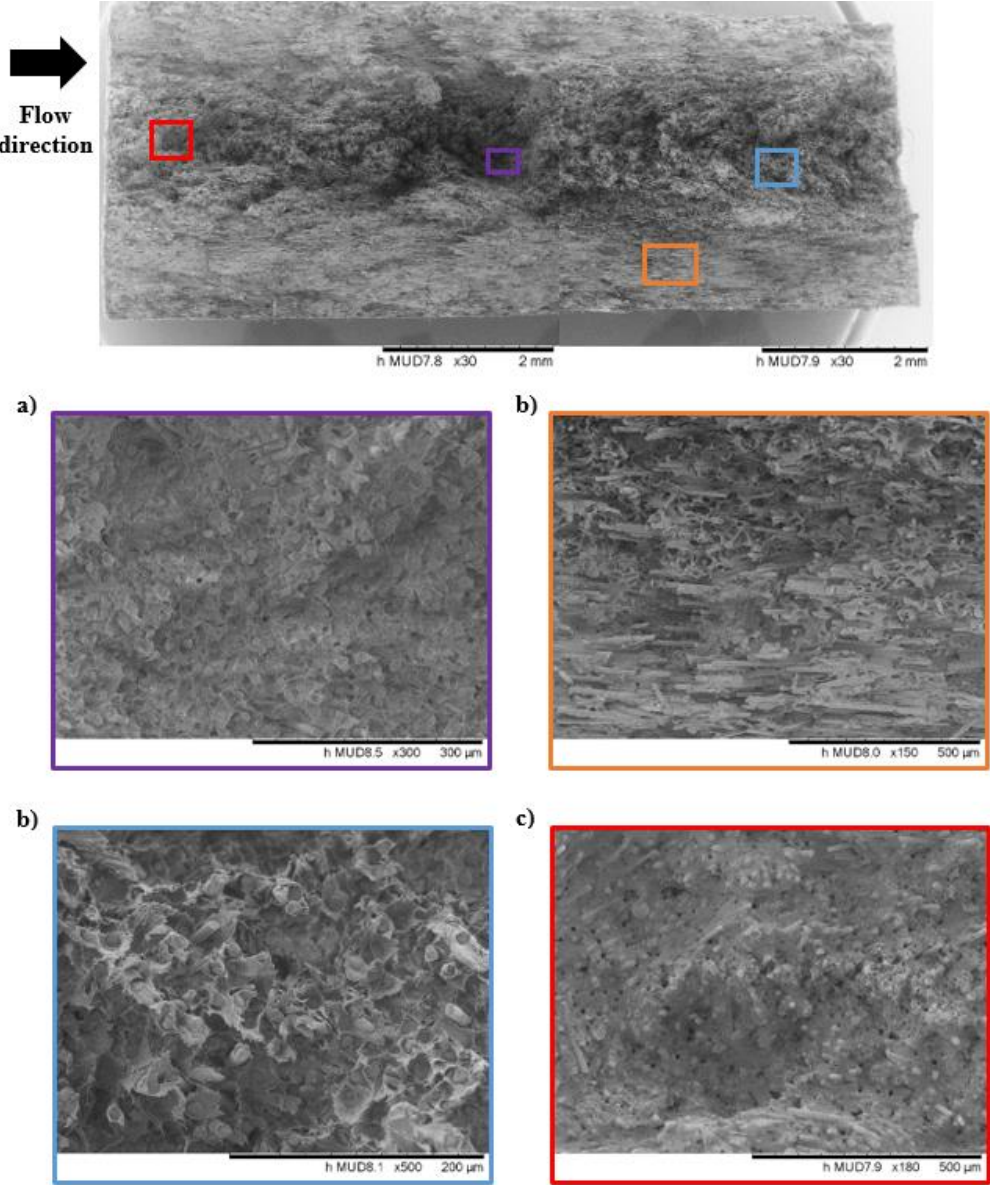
Fracture surface of a tensile 90° specimen at 50° C
